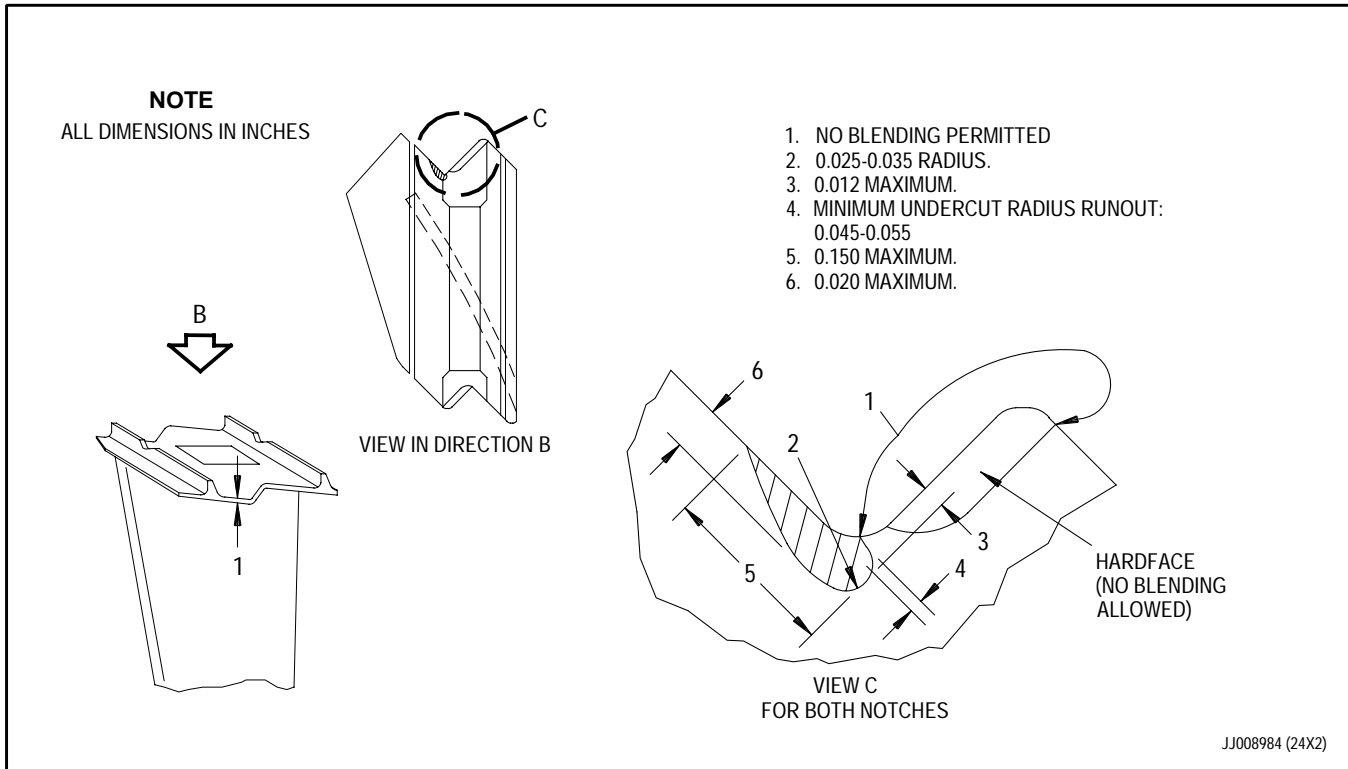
Fourth Stage Turbine Rotor Blade - Shroud Notch Blend Repair Limits
